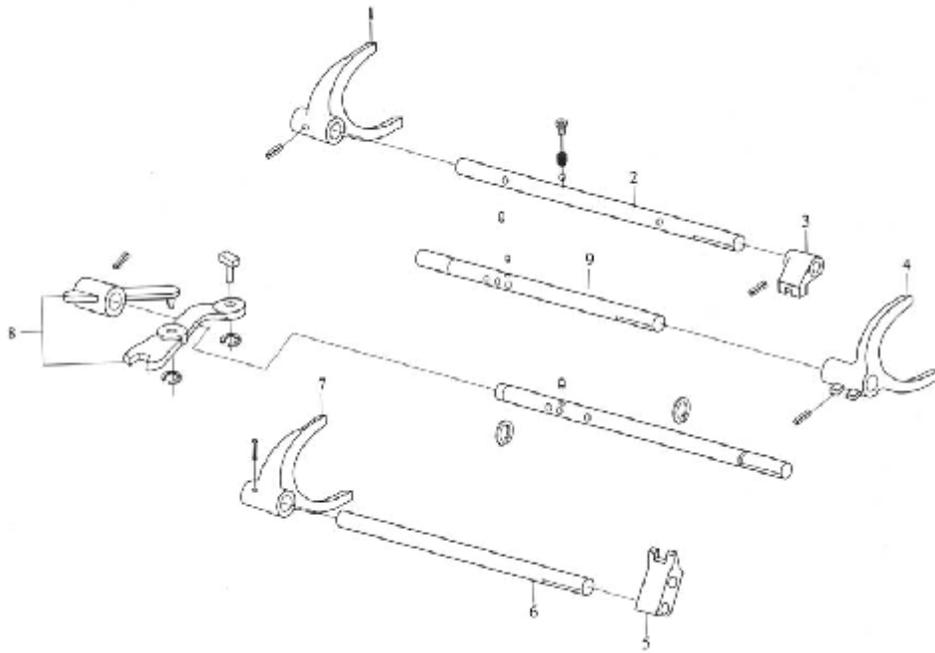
Intermediate Connecting Plate Component of Transmission (control part)
